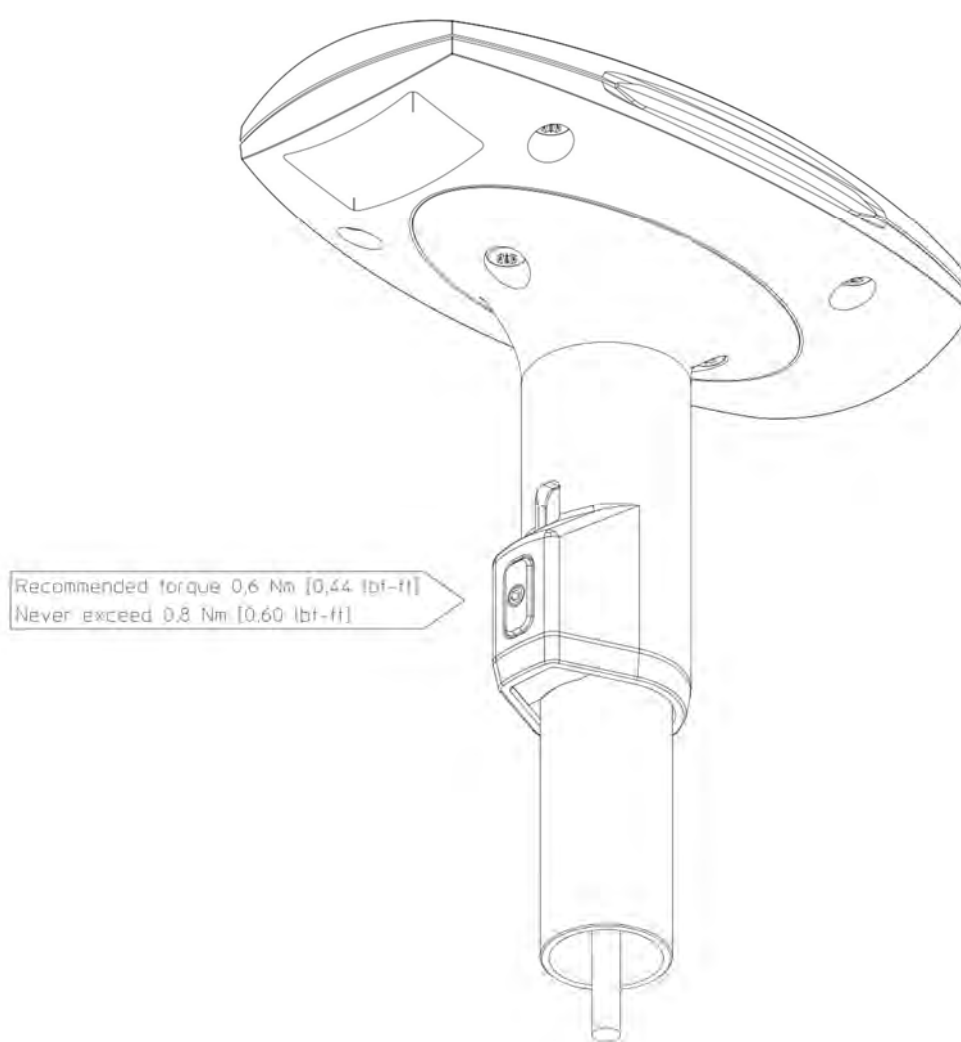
POLE MOUNT INSTALLATION STEP 7 (FASTENING THE PINOL SCREW IN THE POLE MOUNT)
